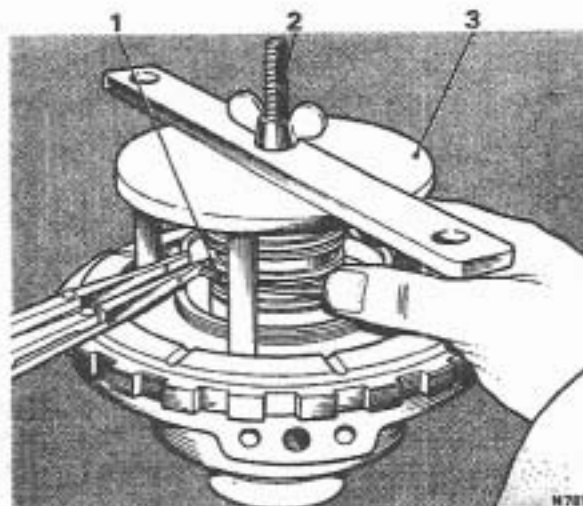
REMOVING AND FITTING THE INTERMEDIATE CLUTCH PISTON SNAP RING
